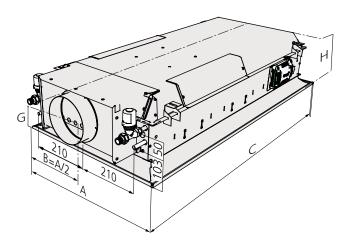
Dimensional drawing - short side connection (the length 1200 with air connection on side 1 is shown in the example).
